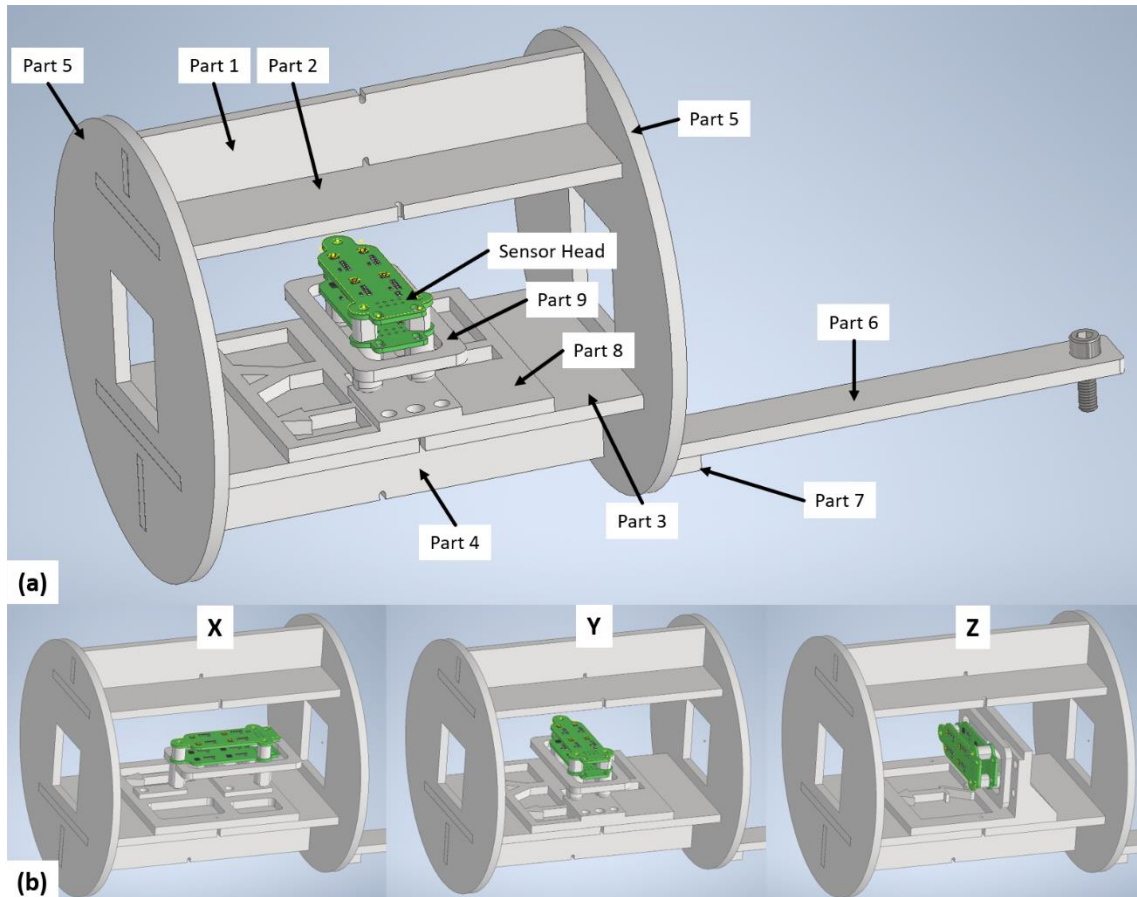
(1) CAD Picture of used slider. (b) Mounting of Sensor to measure different axes
